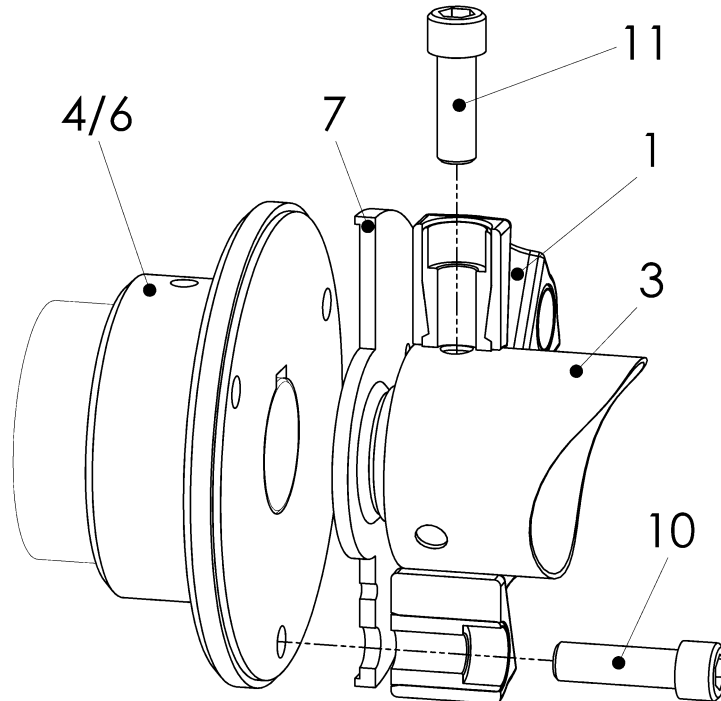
Positioning the tube with the elastic elements and the adapter assemblies in the installation space
